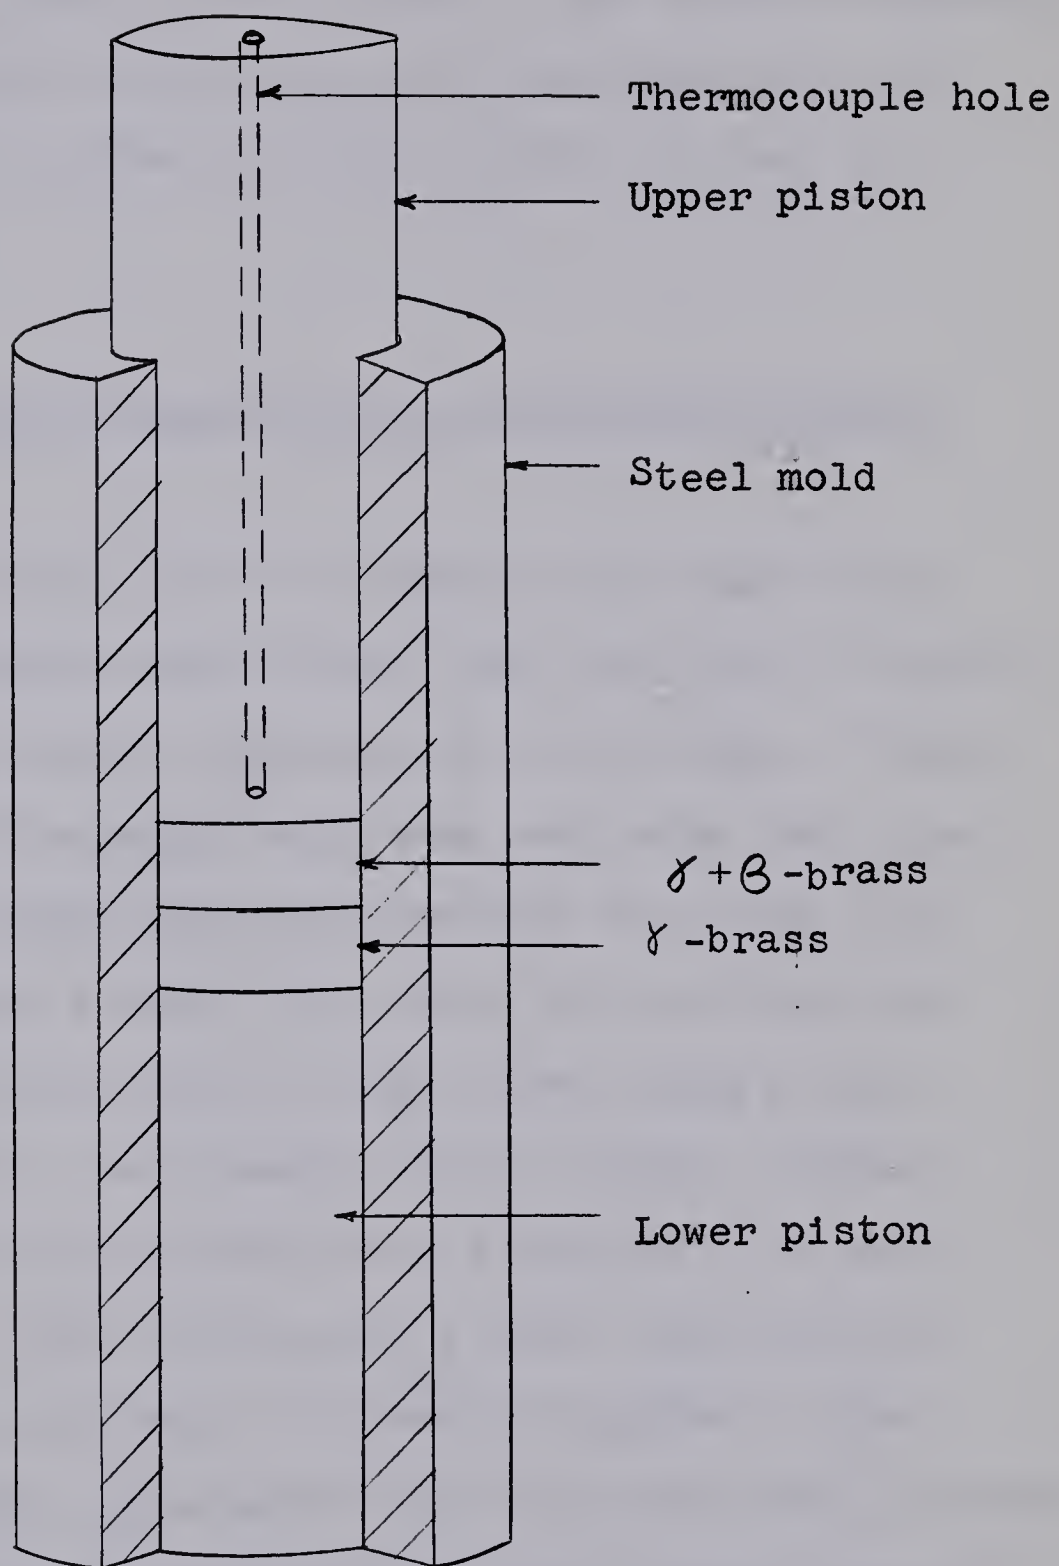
Welding mold for γ -brass diffusion couples.
